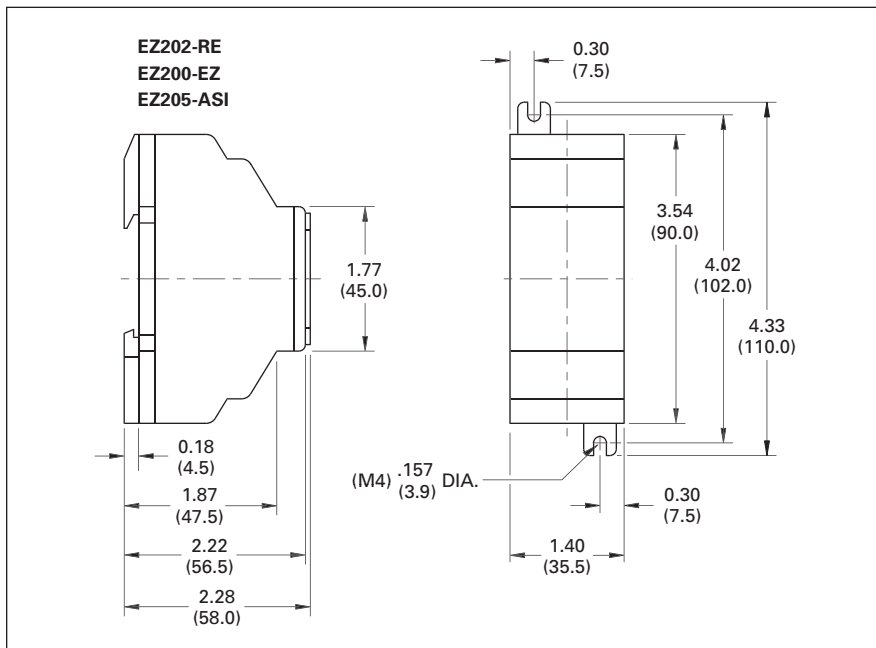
EZ202-RE/EZ200-EZ/EZ205-ASI Series Dimensions in Inches (mm), Drawing Number MD05013012E
